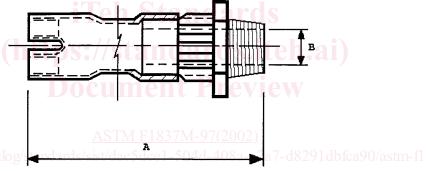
Type II-Multi-Legged Threaded Cable Entry Seals
